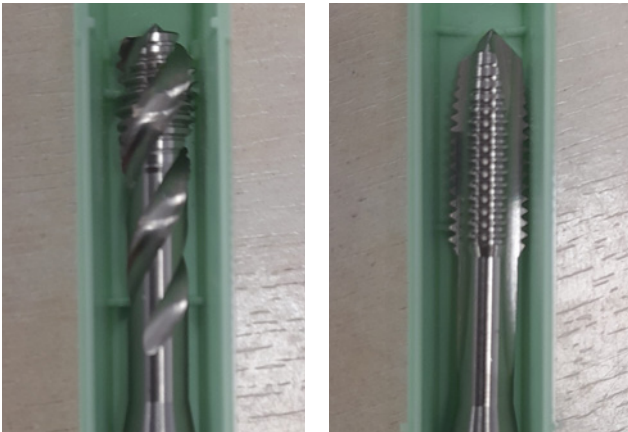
Tap samples. Spiral flute tap (L) and straight flute tap (R)
